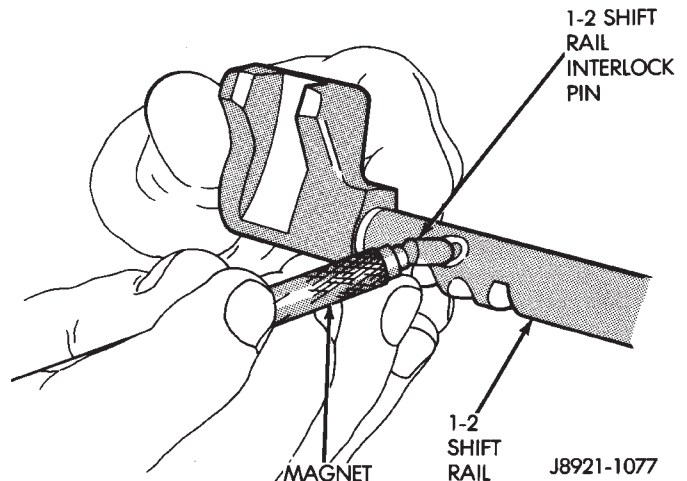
Removing 1-2 Shift Rail Interlock Pin
